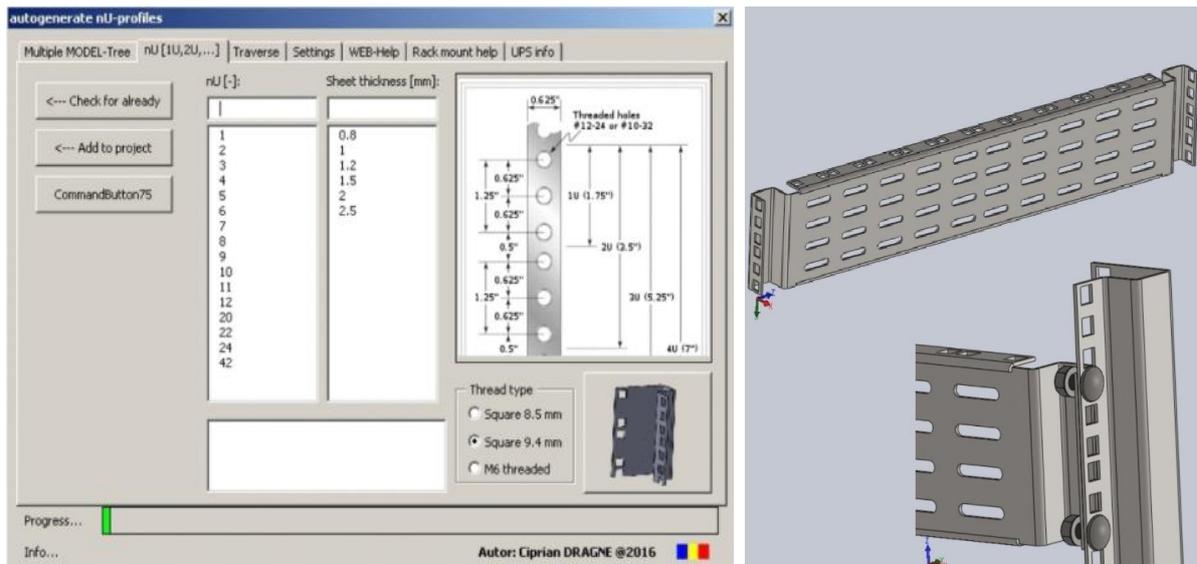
Fully automatically build parts and assemblies in Solidworks-API.
